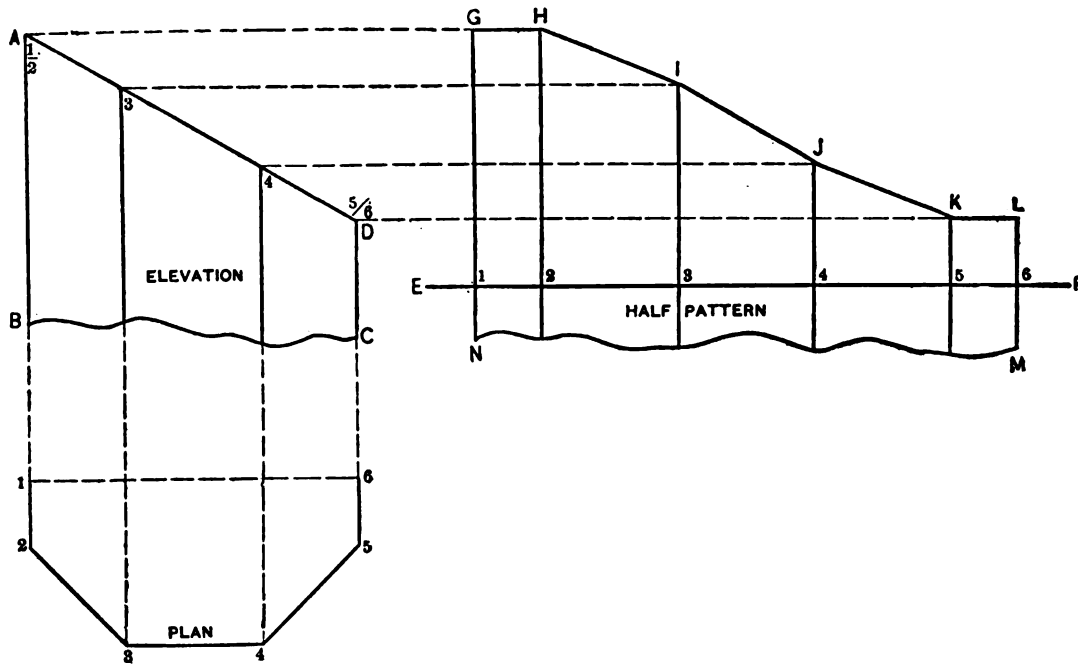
Plan, Elevation and One-Half Pattern for Shaft at Top.
